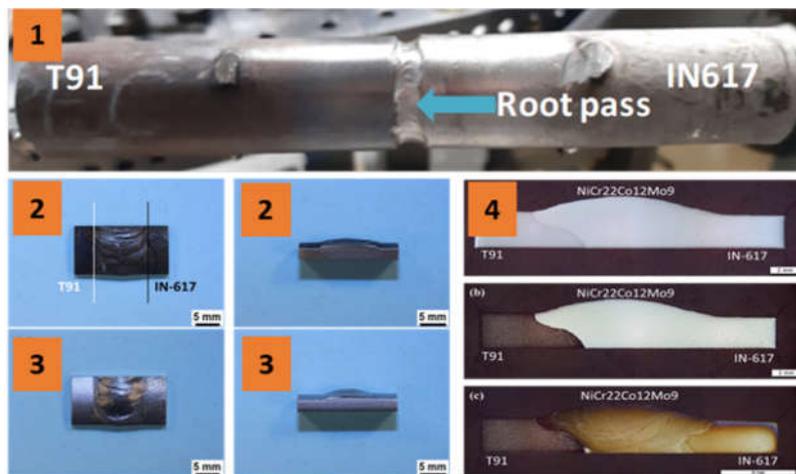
1. Root pass of the weld joint T91-IN617; 2. Top and side views of the T91/IN-617 weld joint coupon sample in the as-manufactured condition and 3 after glass-bead blasting; 4. Cross-sectional images of T91/IN-617 weld sample, non-etched, V2A-pickle etched and 10% oxalic acid aqueous solution etched conditions.
